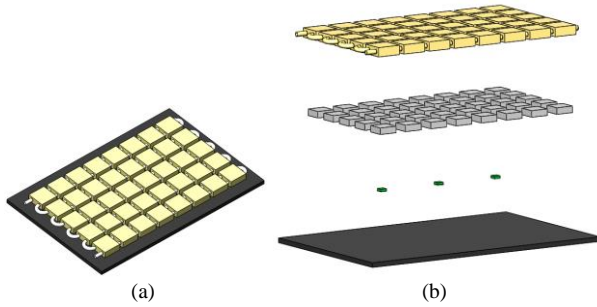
Structural diagram of the wearable subsystem with three layers. (a). Cross-sectional view. (b). Exploded view.
